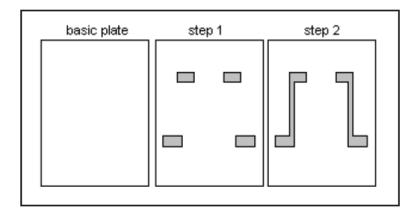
Rectangular plate and "f- hole" cutting steps [3]
